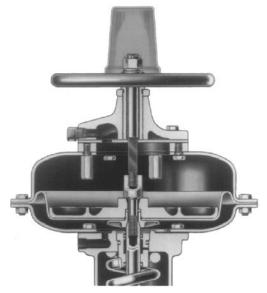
Top-mounted handwheel mounted on a reverse-acting diaphragm actuator. (*Courtesy of Fisher Controls International, Inc.*)
